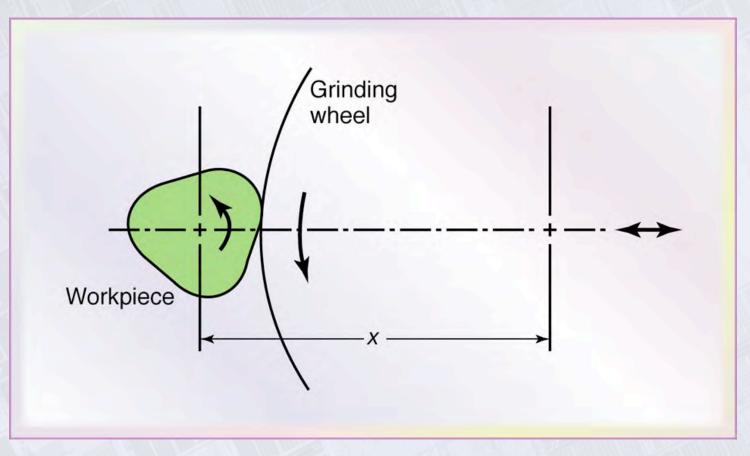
Schematic illustration of grinding a noncylindrical part on a cylindrical grinder with computer controls to produce the shape. The part rotation and the distance *x* between centers is varied and synchronized to grind the particular workpiece shape.
